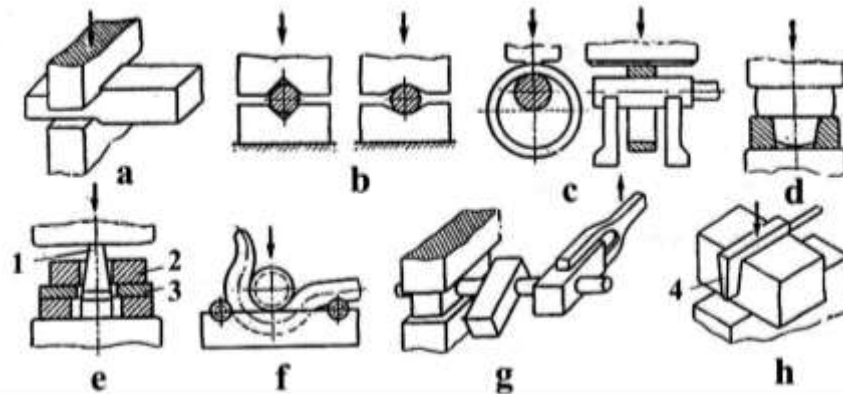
The main hammering operations: a, b – drawing; c – ring rolling; d – heading; e – piercing; f – bending; g – twisting; h – cutting off
